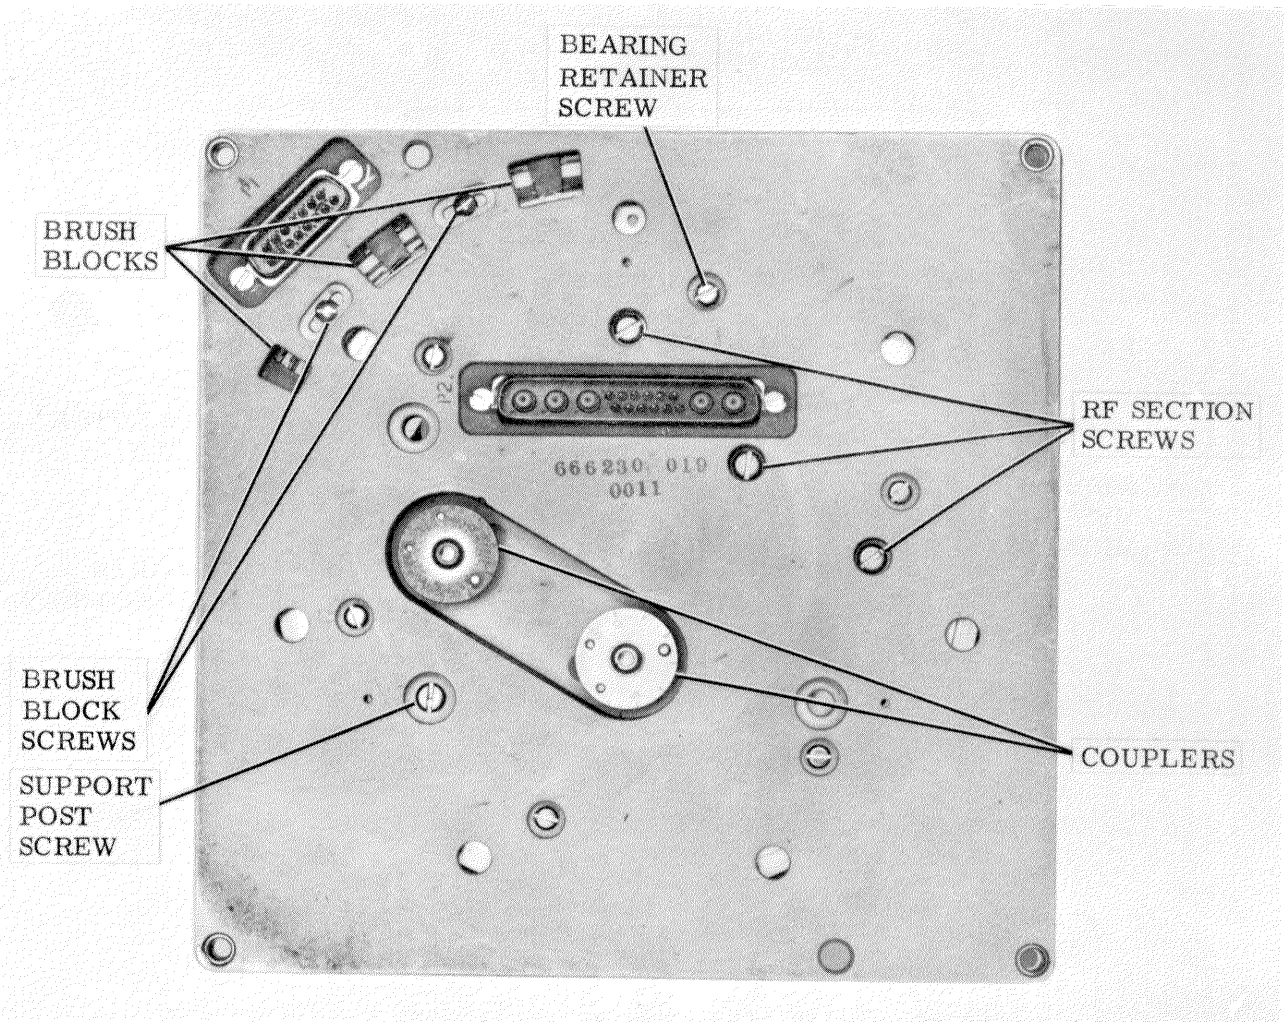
RF Amplifier Electronic Assembly, Bottom View
